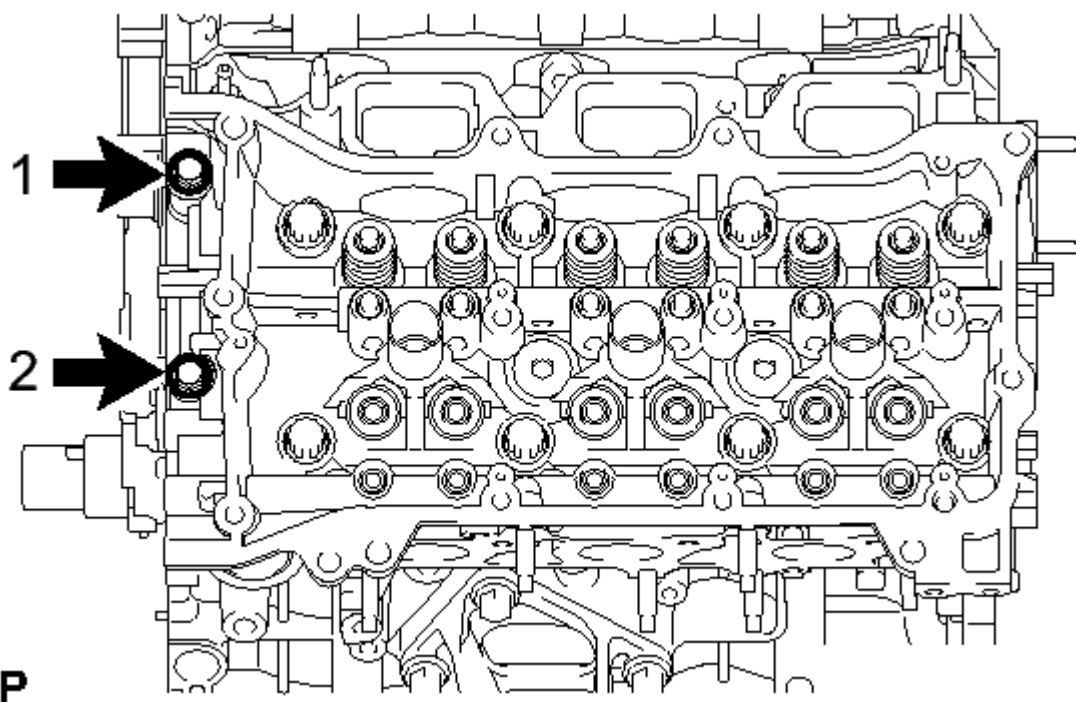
Identifying Cylinder Head LH And Cylinder Head Set Bolts With Tightening Sequence
